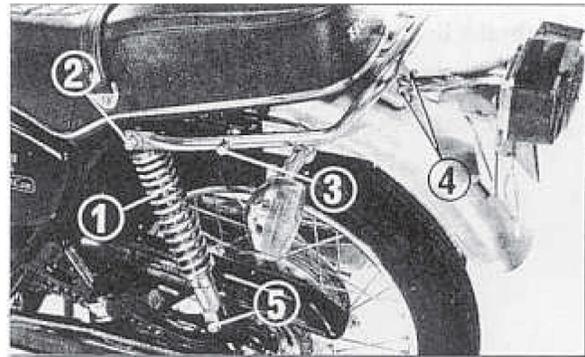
(1) Rear shock absorber (4) Cap nut
